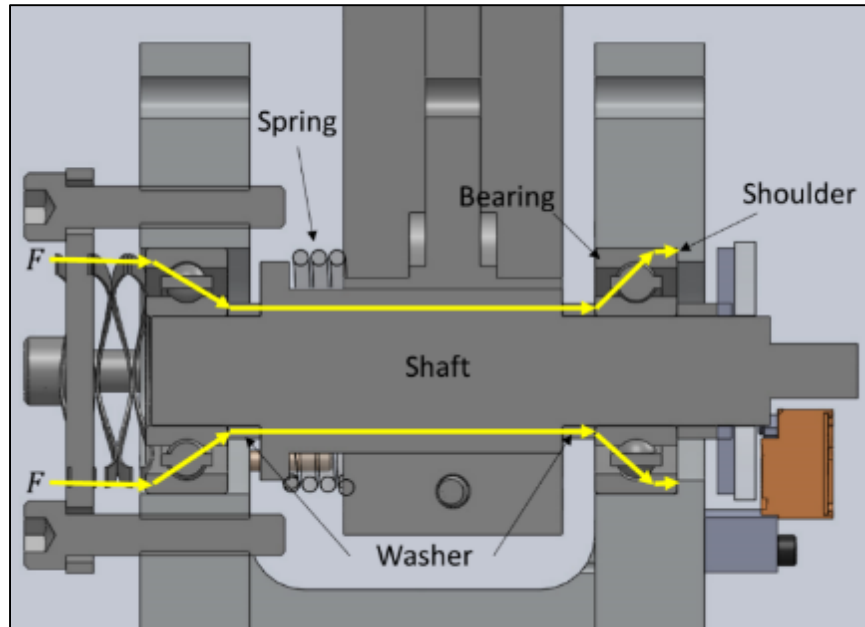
Section view of each arm assembly with body and force path for preloading bearing, first measuring instrument design
